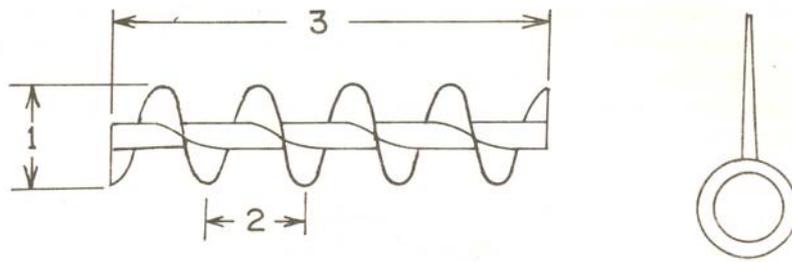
Screw conveyor-details: 1) Screw diameter, 2) Pitch of screw, 3) Screw length
